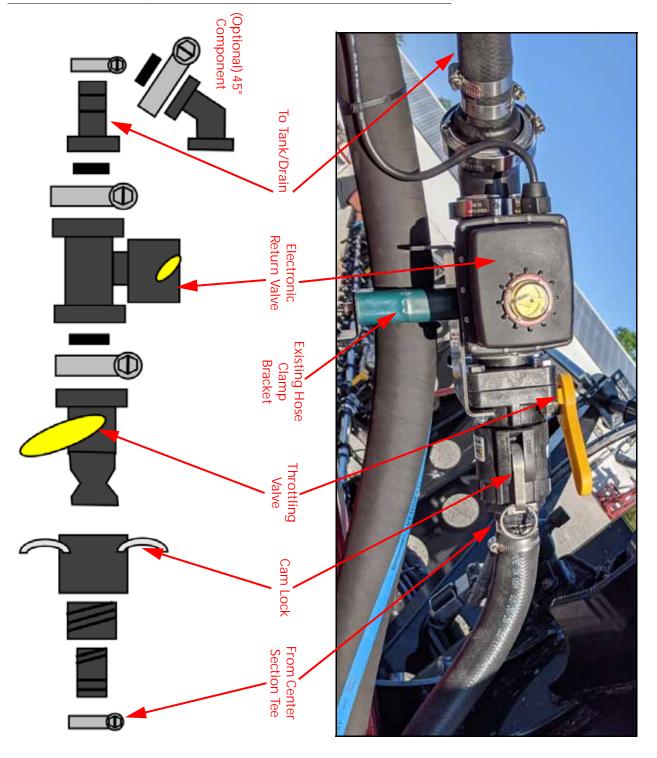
Throttling Valve and Electronic Recirculation Valve Mounting Options and Examples
